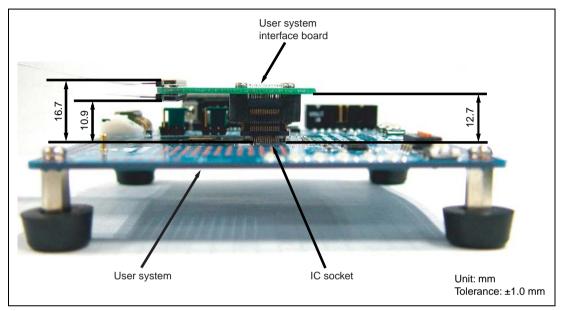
Resulting Dimensions after Connecting User System Interface Board
